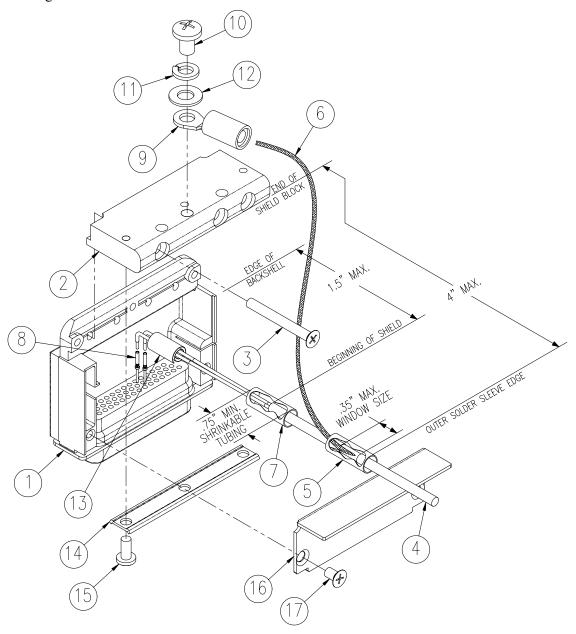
Shield Block Install onto Backshell Connector Assembly
